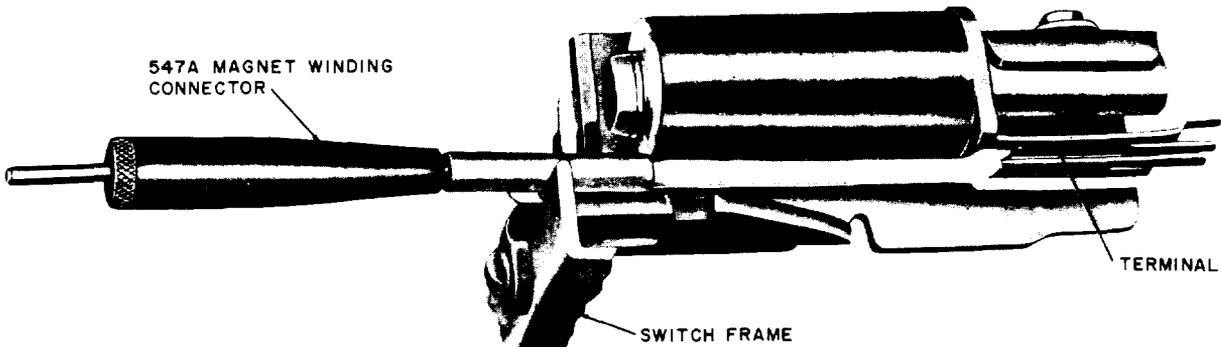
Connecting to Winding Terminal of the Hold Magnet of the 324-, 325-, 328-, 334-, and 338-Type Switches
